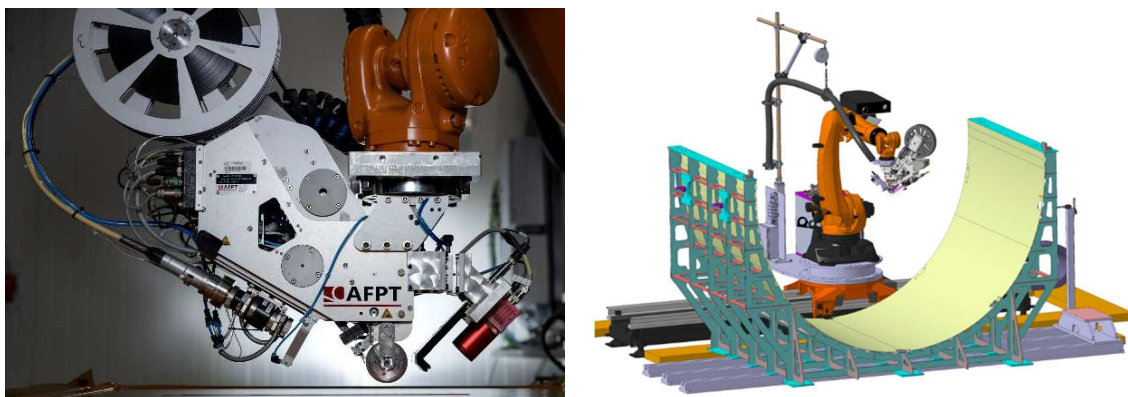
Machine setup - MTLH AFP endeffector (left) & CAD layout of the robotic cell (right)
